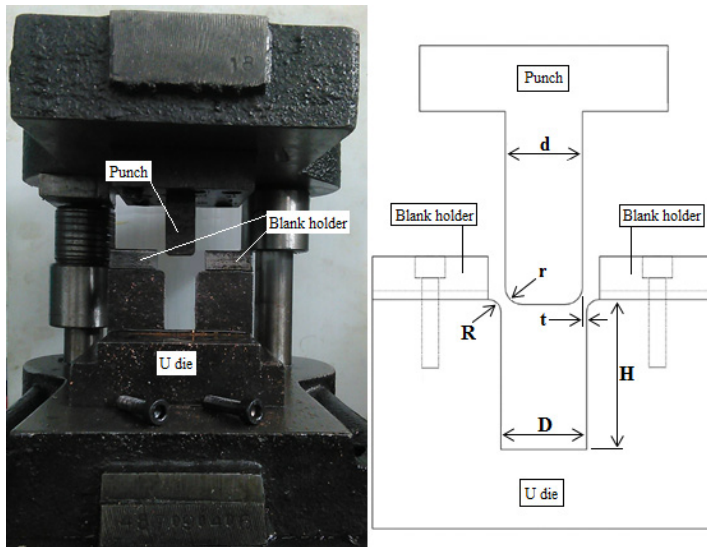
Real and schematic view of U-shape bending die with dimensional parameters.
